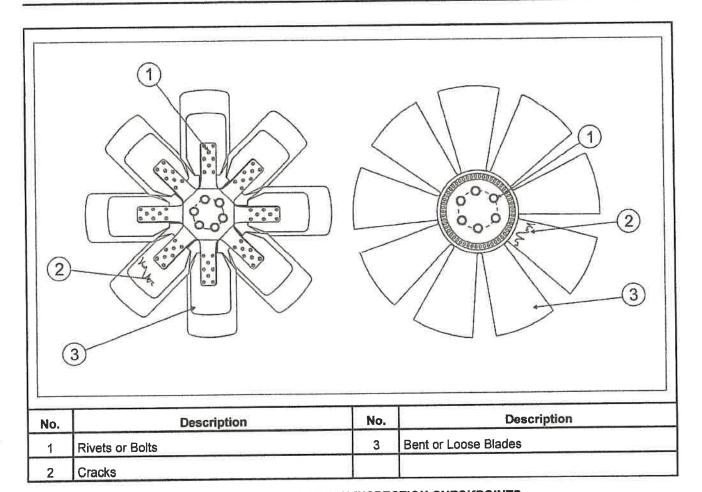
COOLING FAN INSPECTION CHECKPOINTS
